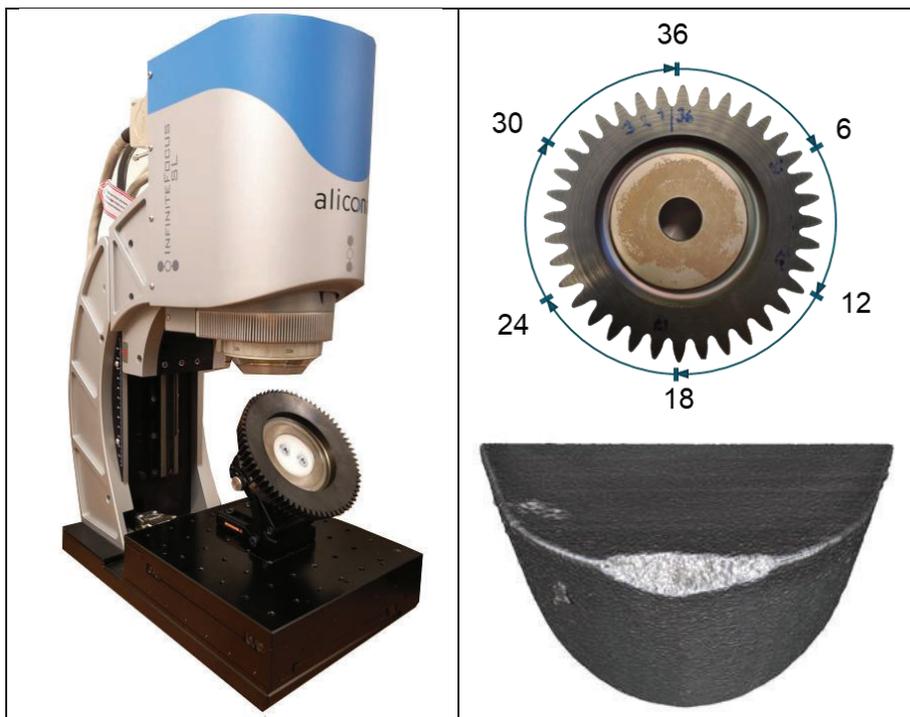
Measuring setup with the Infinite focus SL instrument , fixture and tool, the measured teeth and a typical wear appearance.
